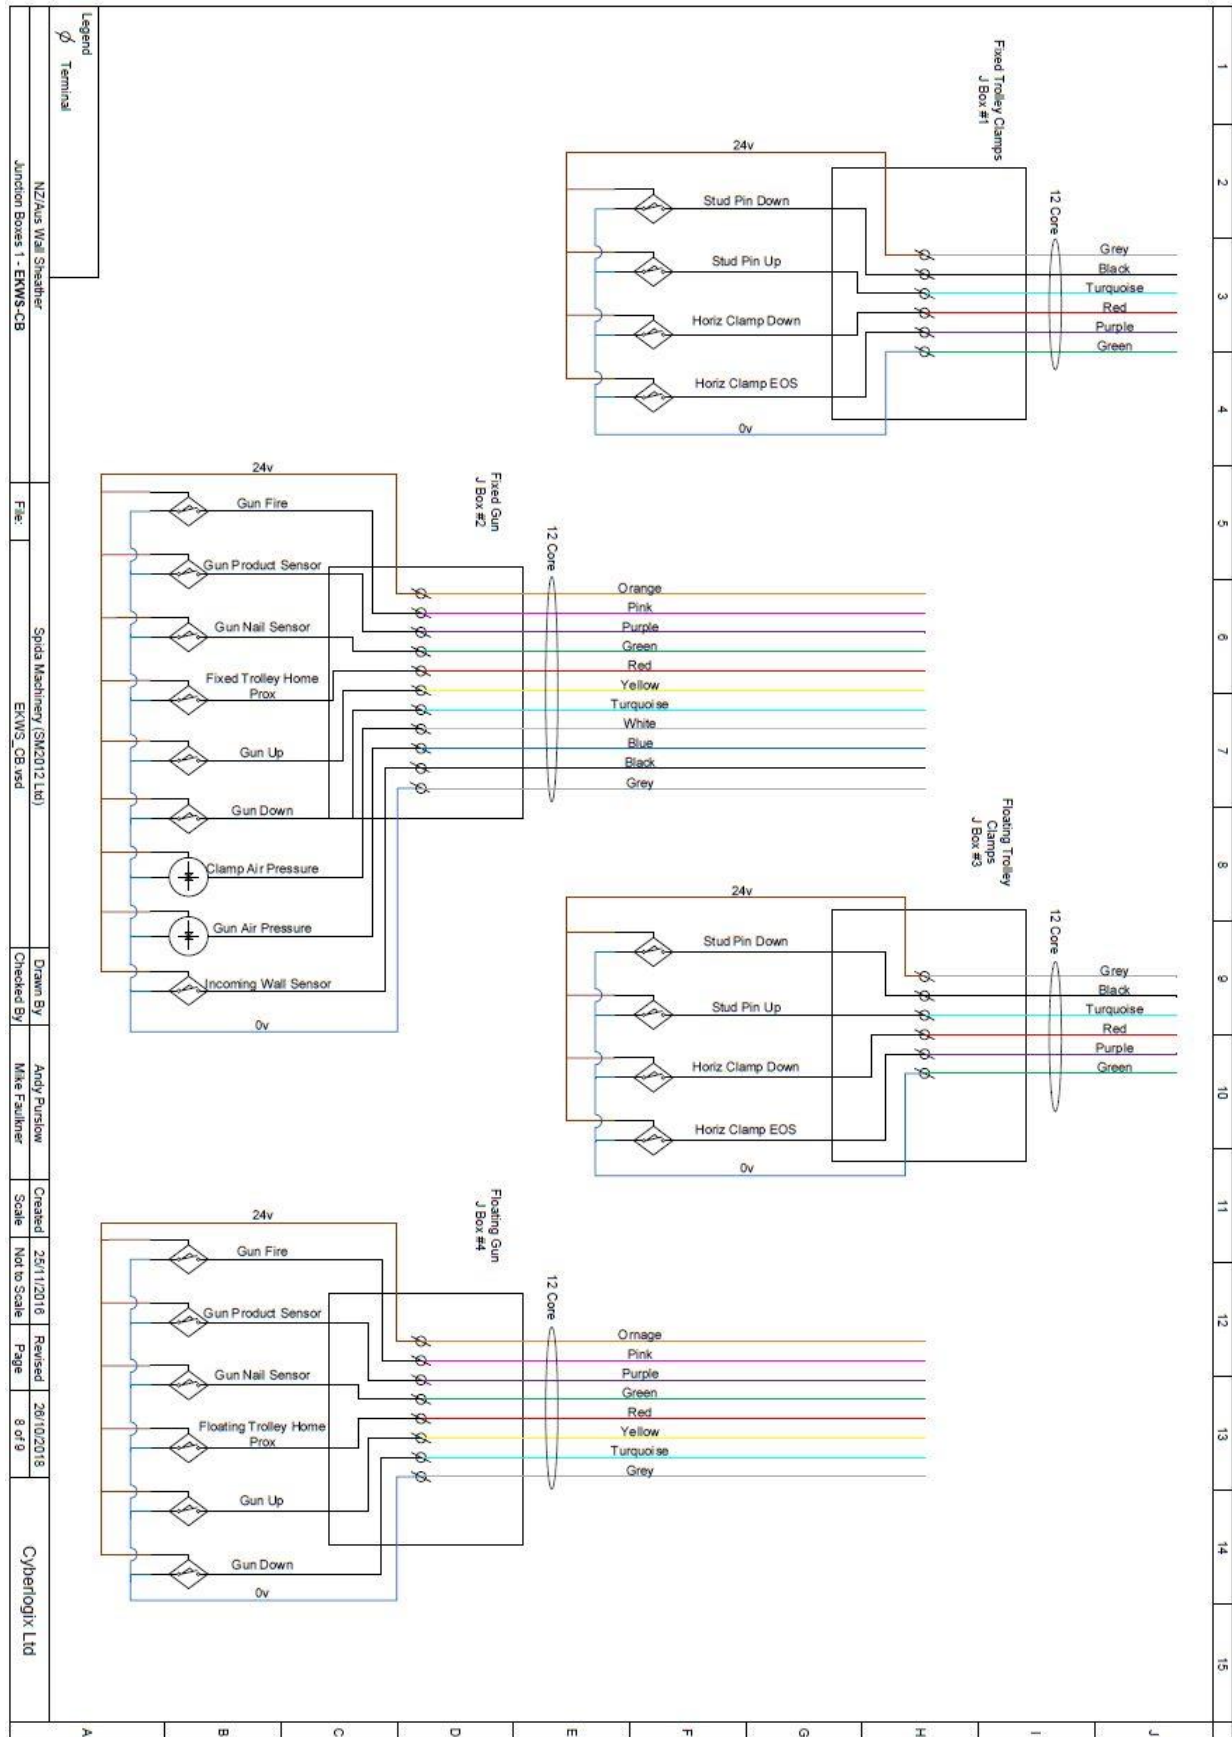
, Spida Auto Sheather Electrical Drawings NZ/AU part 8
